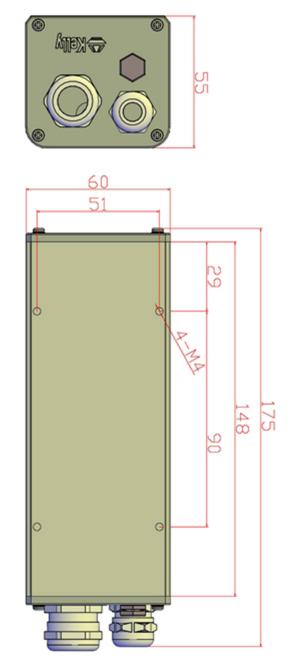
KLS-4818Z KLS7218Z KLS8418Z mounting holes' dimensions (dimensions in millimeters)
